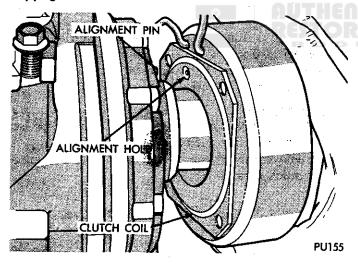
Installing Clutch Coil, C-171 Compressor CLUTCH INSTALLATION
